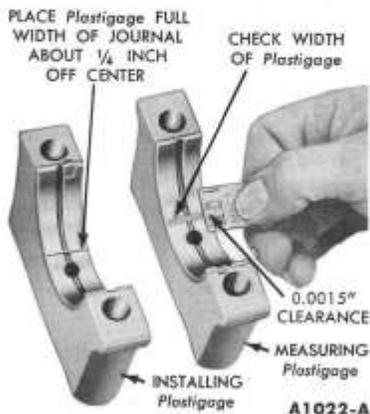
Installing and Measuring Plastigage—Engine Installed
